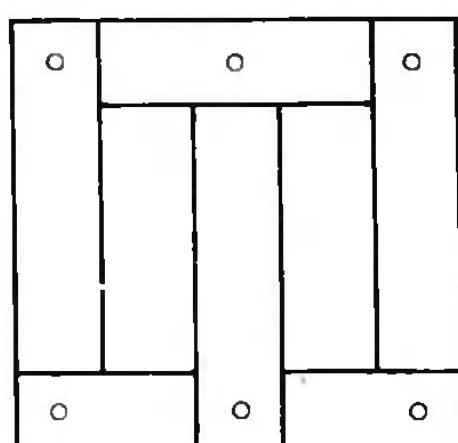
Imbricated type of transformer core with right-angled joints
